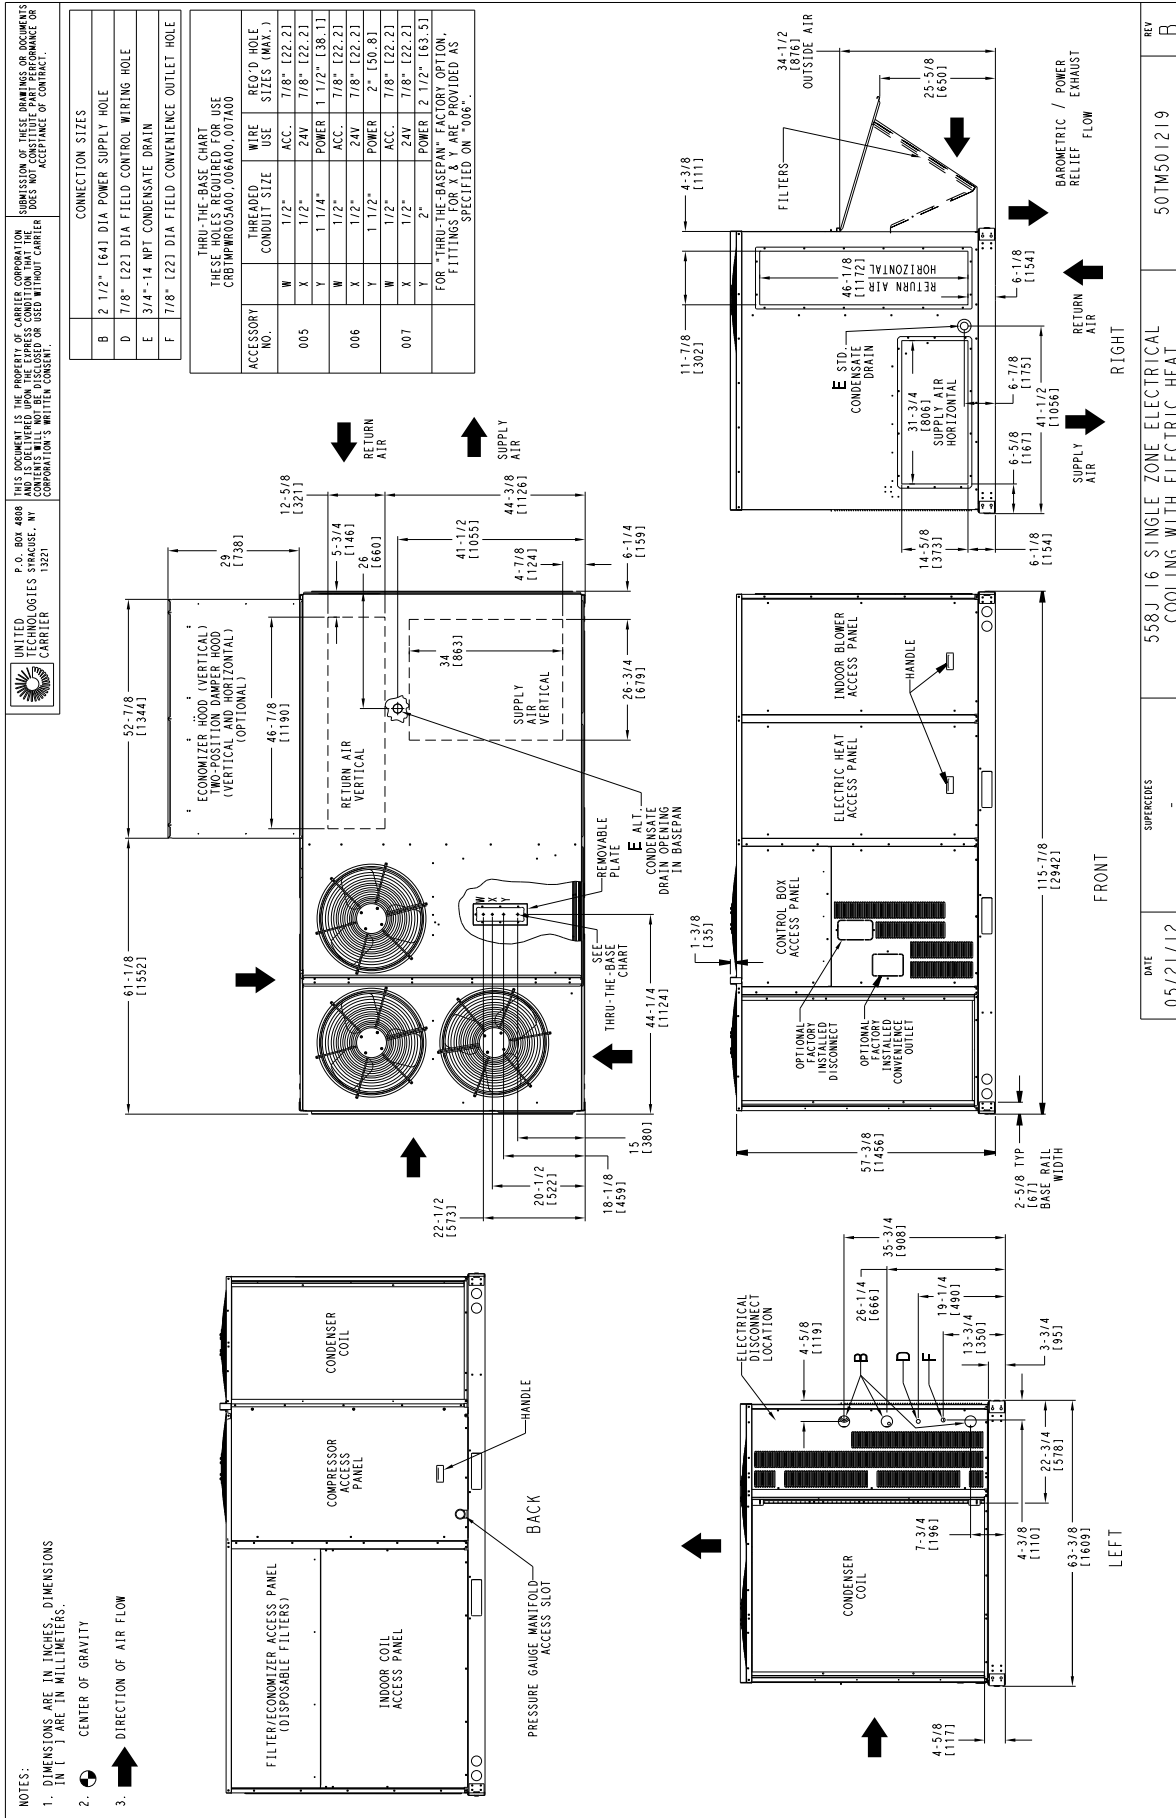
Dimensions 558J 16 (Sheet 1 of 2)
